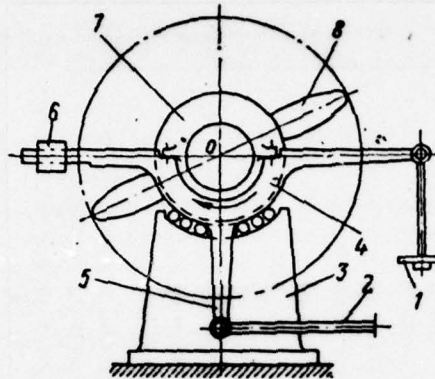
Schematic diagram of bob machine tool. 1 - calibration instrument, 2 - rodding, 3 - fixed mounting, 4 - frame, 5 - lever, 6 - regulating load, 7 - engine, 8 - propeller.
